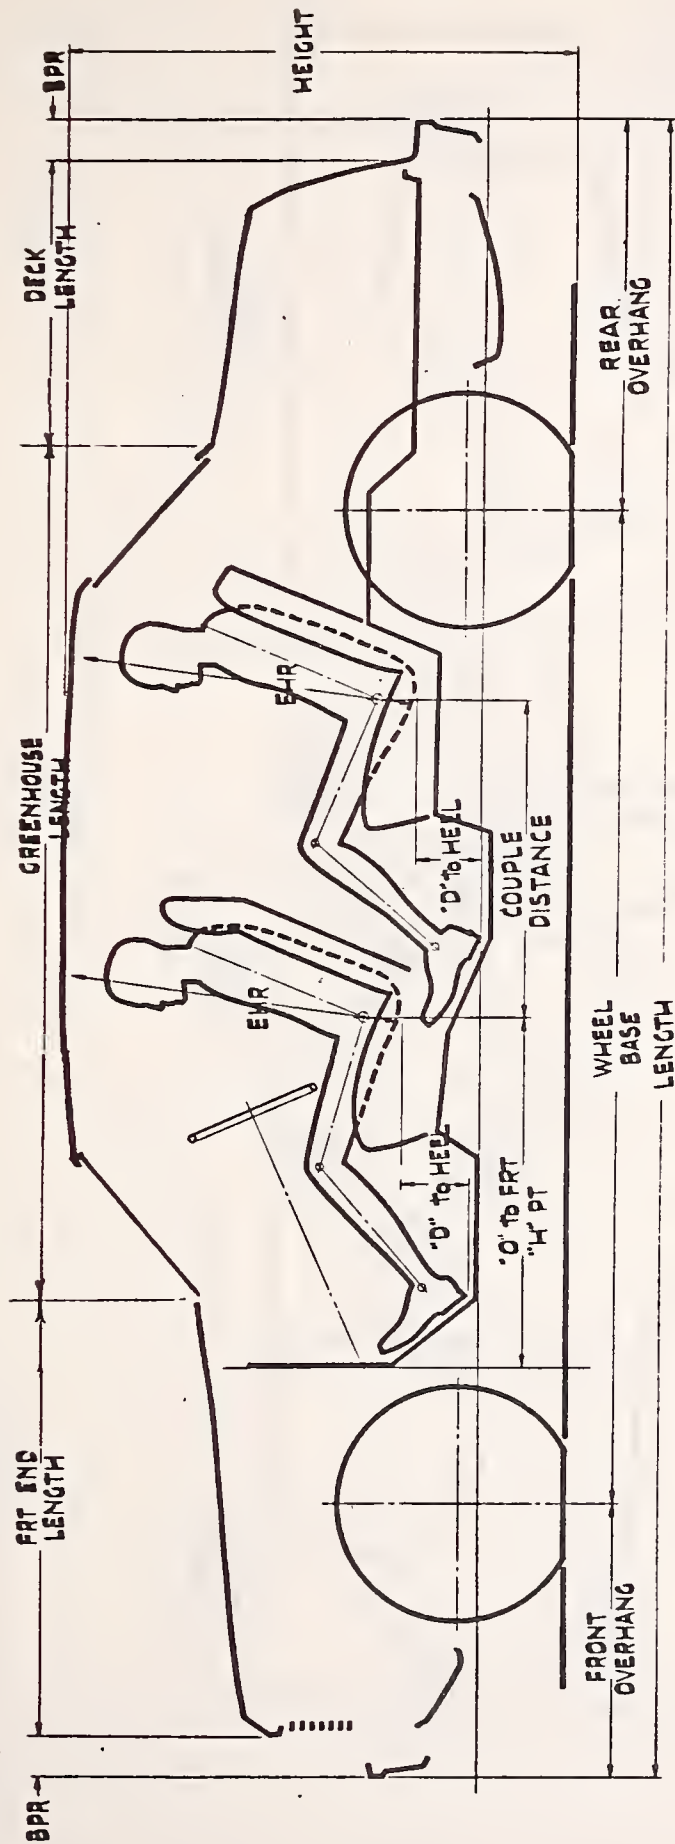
H. OPTIMUM SIX PASSENGER PACKAGE
